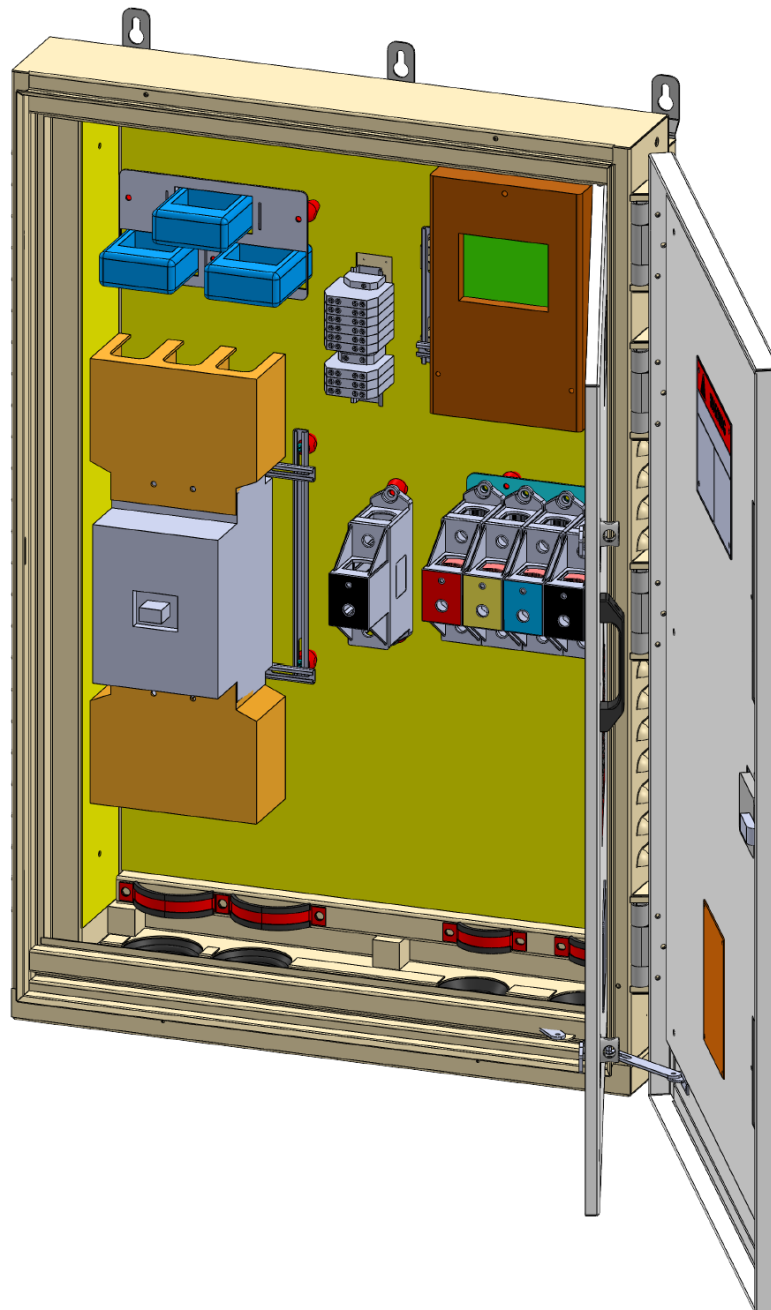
Layout Drawing of 300/400A and 500/600A CT-Meterboxes with Steel Enclosures with Main Door Opened
